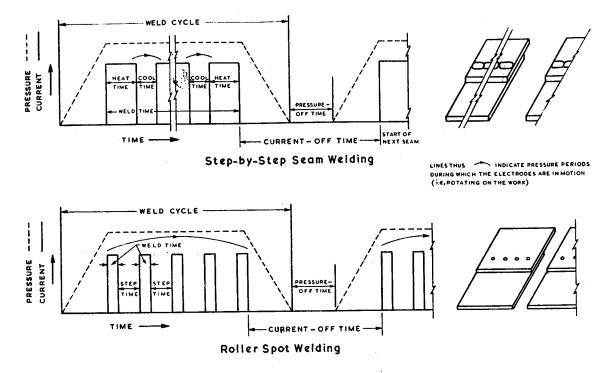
Time and Pressure Diagrams for Step-by-Step Seam Welding and Roller Spot Welding
